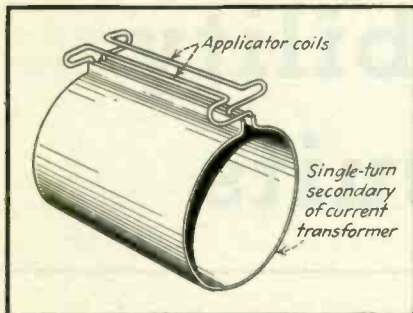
Simplified sketch showing manner in which the applicator coils are mounted on the secondary of the current transformer. In the installation under discussion provision is made for cooling the applicators by passing water through
